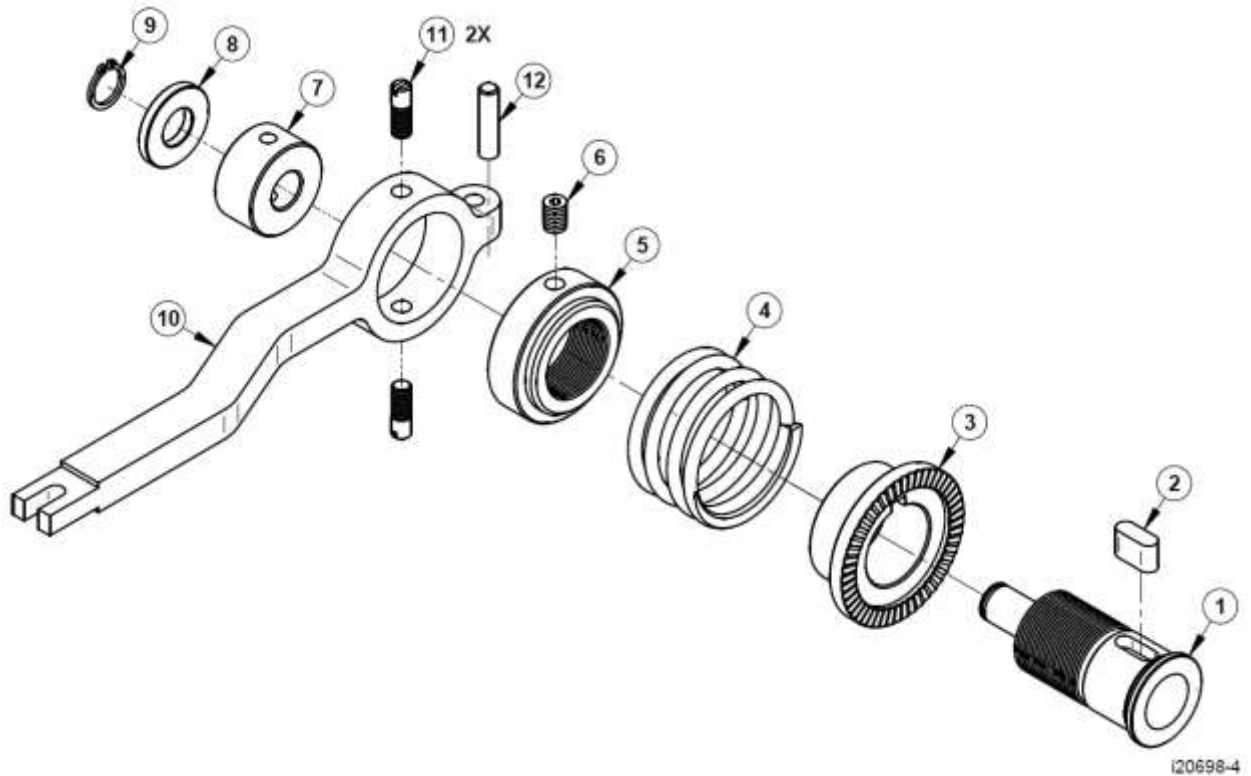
& Parts List Shown - TRAK K4EMX - Quill Pinion Shaft Assy - P/N: 20698-3
